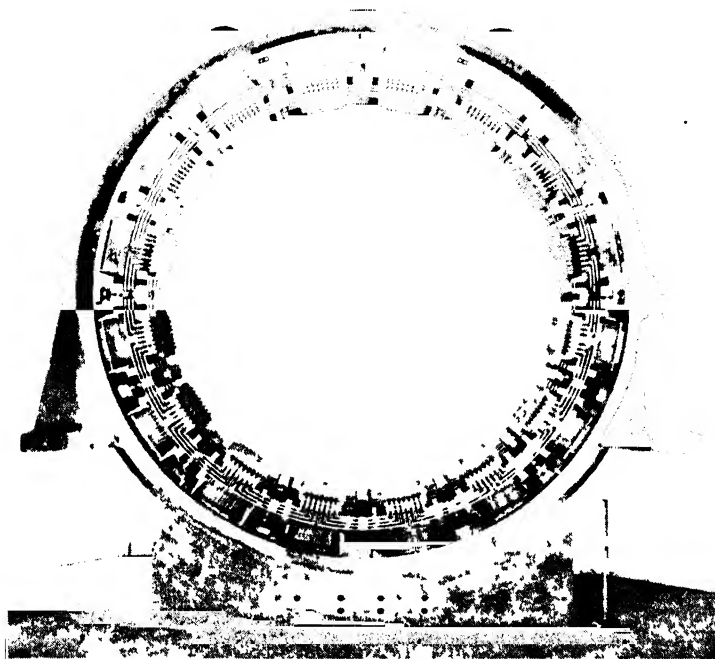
10. A field-frame of generator equipped with compensating windings. *Crocker-Wheeler Electric Mfg. Co.
